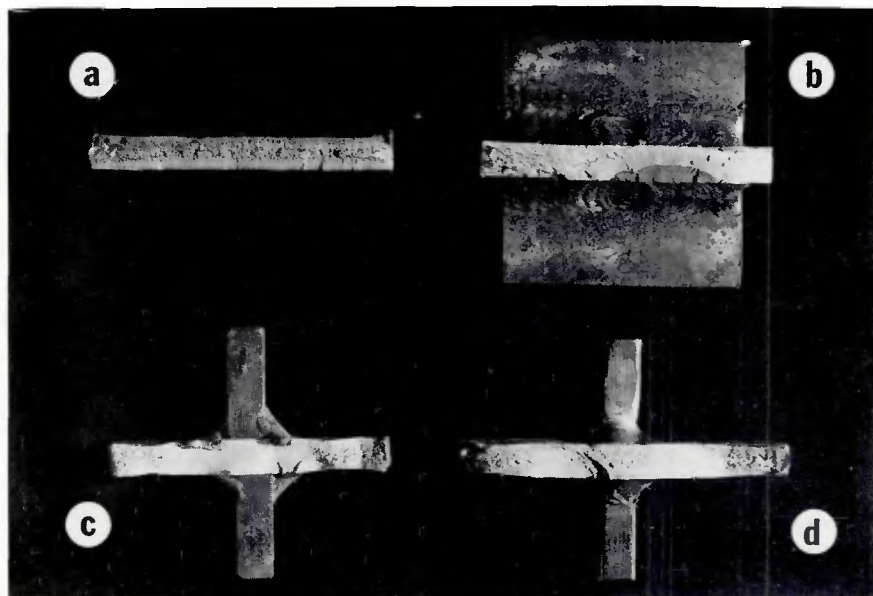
Fractures in joints which fail from the toe of the weld
